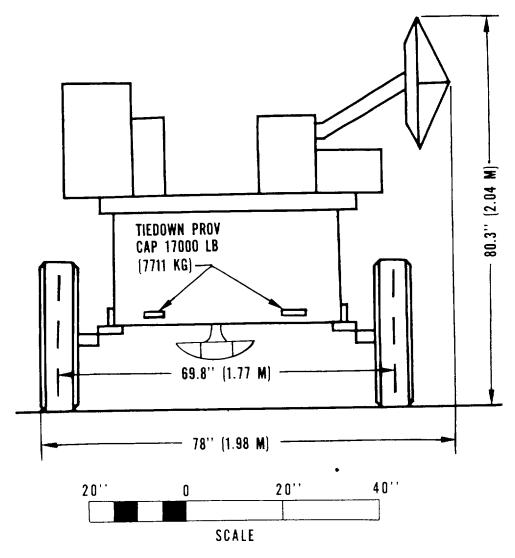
Rear elevation, Gun, Air Defense Artillery, Towed, 20-mm, M167A1. 2-7
